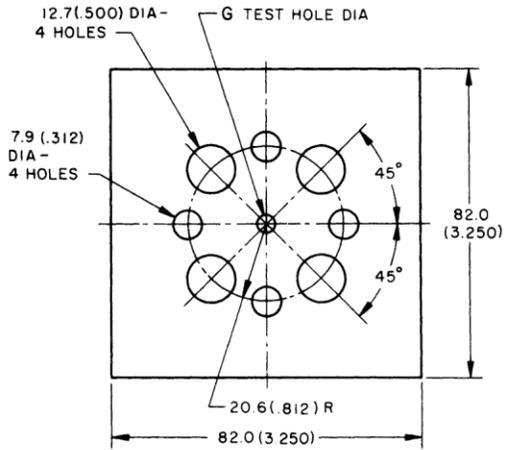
A—DETAIL OF PLATE USED FOR TENSION TESTS
